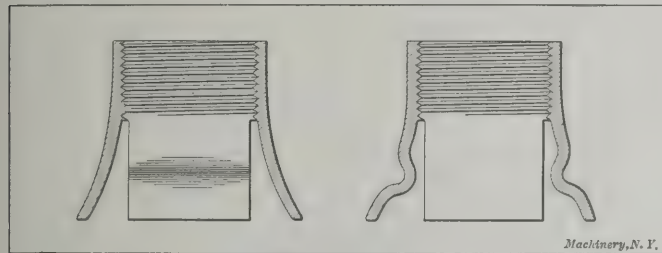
Special Sleeve for Gripping the End of the Broken Rod
